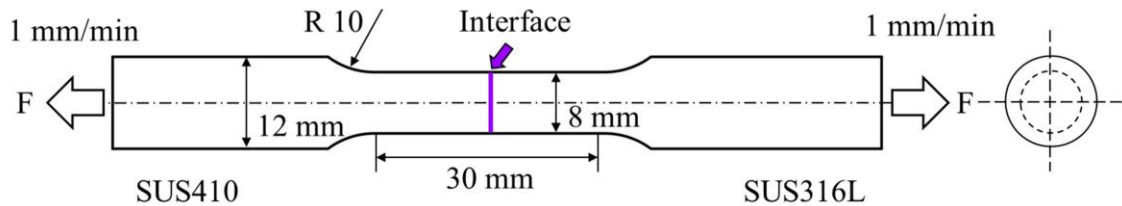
Dimension of the specimen for quasi-static tensile test
